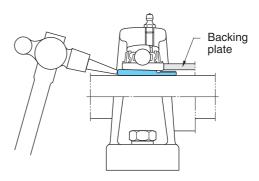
Fitting adapter sleeve to bearing with tapered bore
